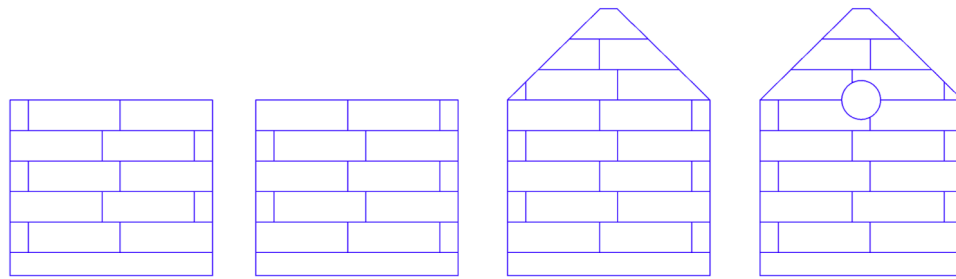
AutoCad Drawing by Rize Martins de Oliveira showing the side, back, and front views, respectively, of the bird box without roof panels
